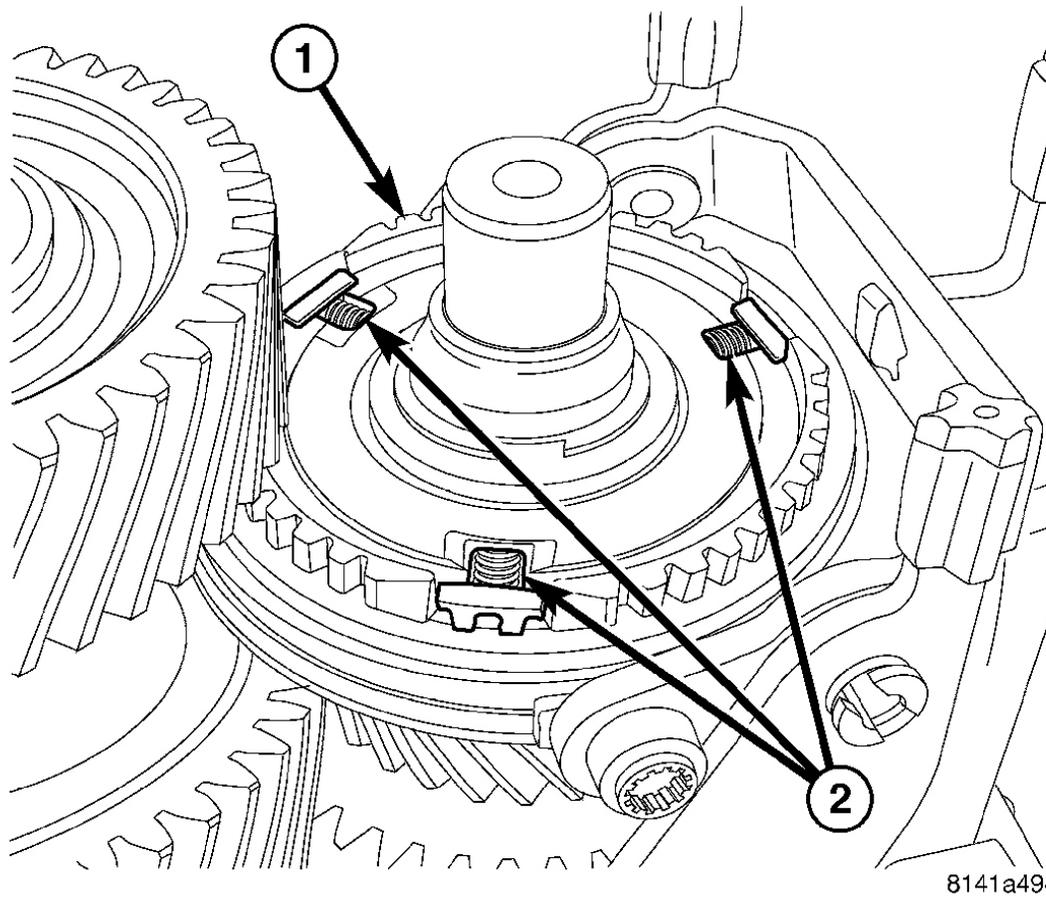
Installing 5-6 Synchronizer Hub Detents, Springs, And Balls
